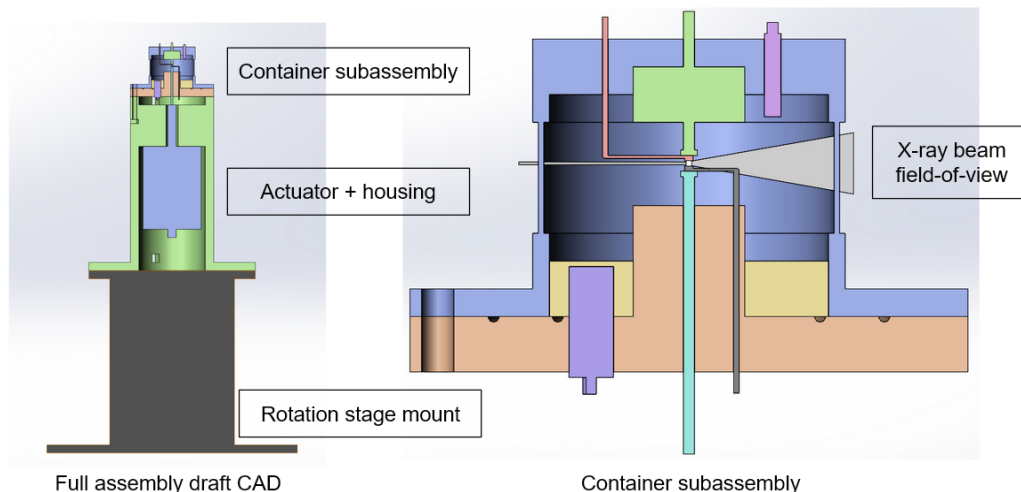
A cross-sectional overview CAD design is shown on the left. On the right are the container sub-assembly and actuator housing sub-assembly with the linear actuator, housing, and mounting hardware to the rotation stage on the x-ray microscope. The view on the right also shows the x-ray beam penetrating into the left side of the container, through the sample, and diffracting out from the right end.
